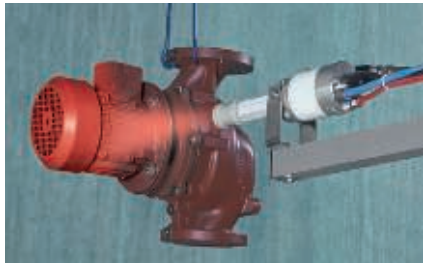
Electrostatic spraying is well suited to this complex assembly.
